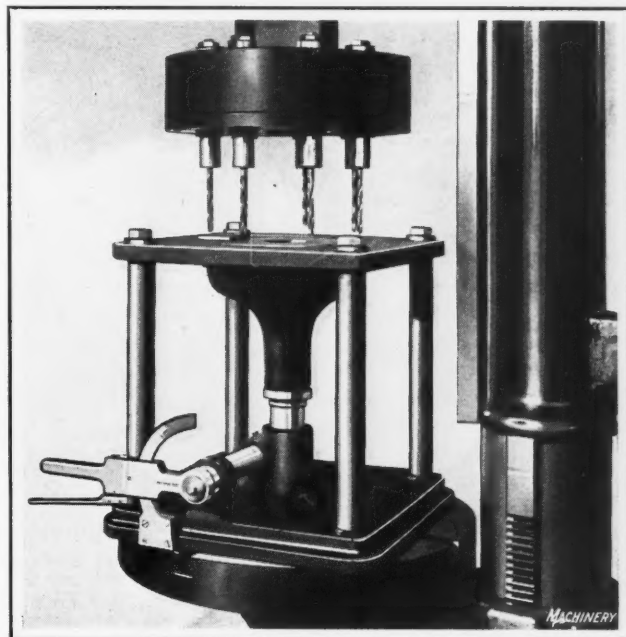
Type B Universal Drill Jig set up for drilling the Bolt Holes in a Bell Casting
